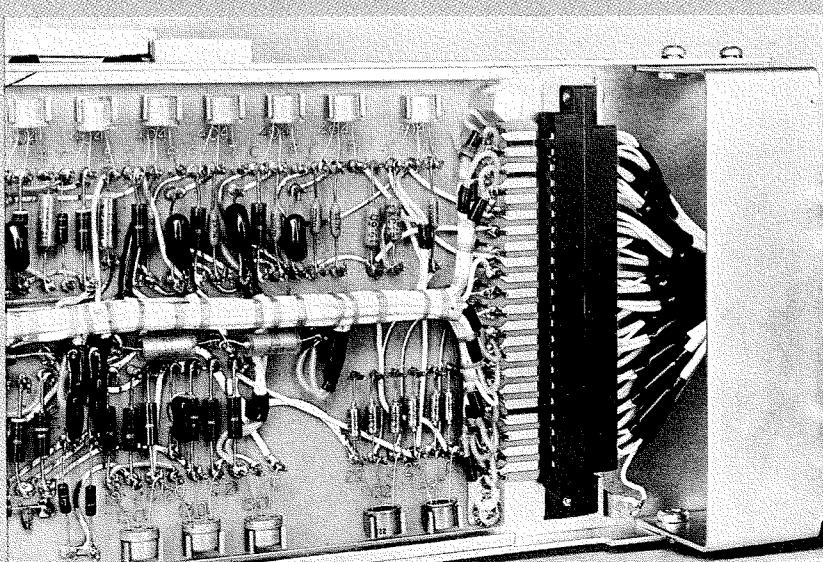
Module disengaged from extender to show mechanical keying of board connector.
